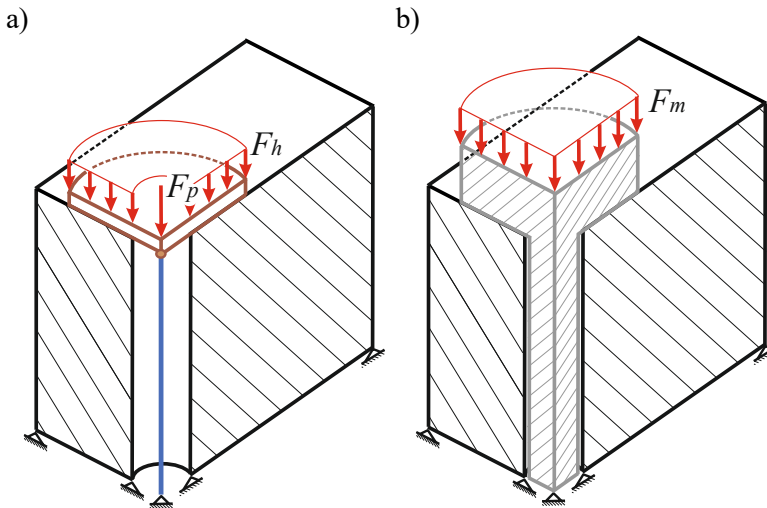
Scheme of the bolted joint loading: a) for the simplified bolt model, b) for the reference bolt model
